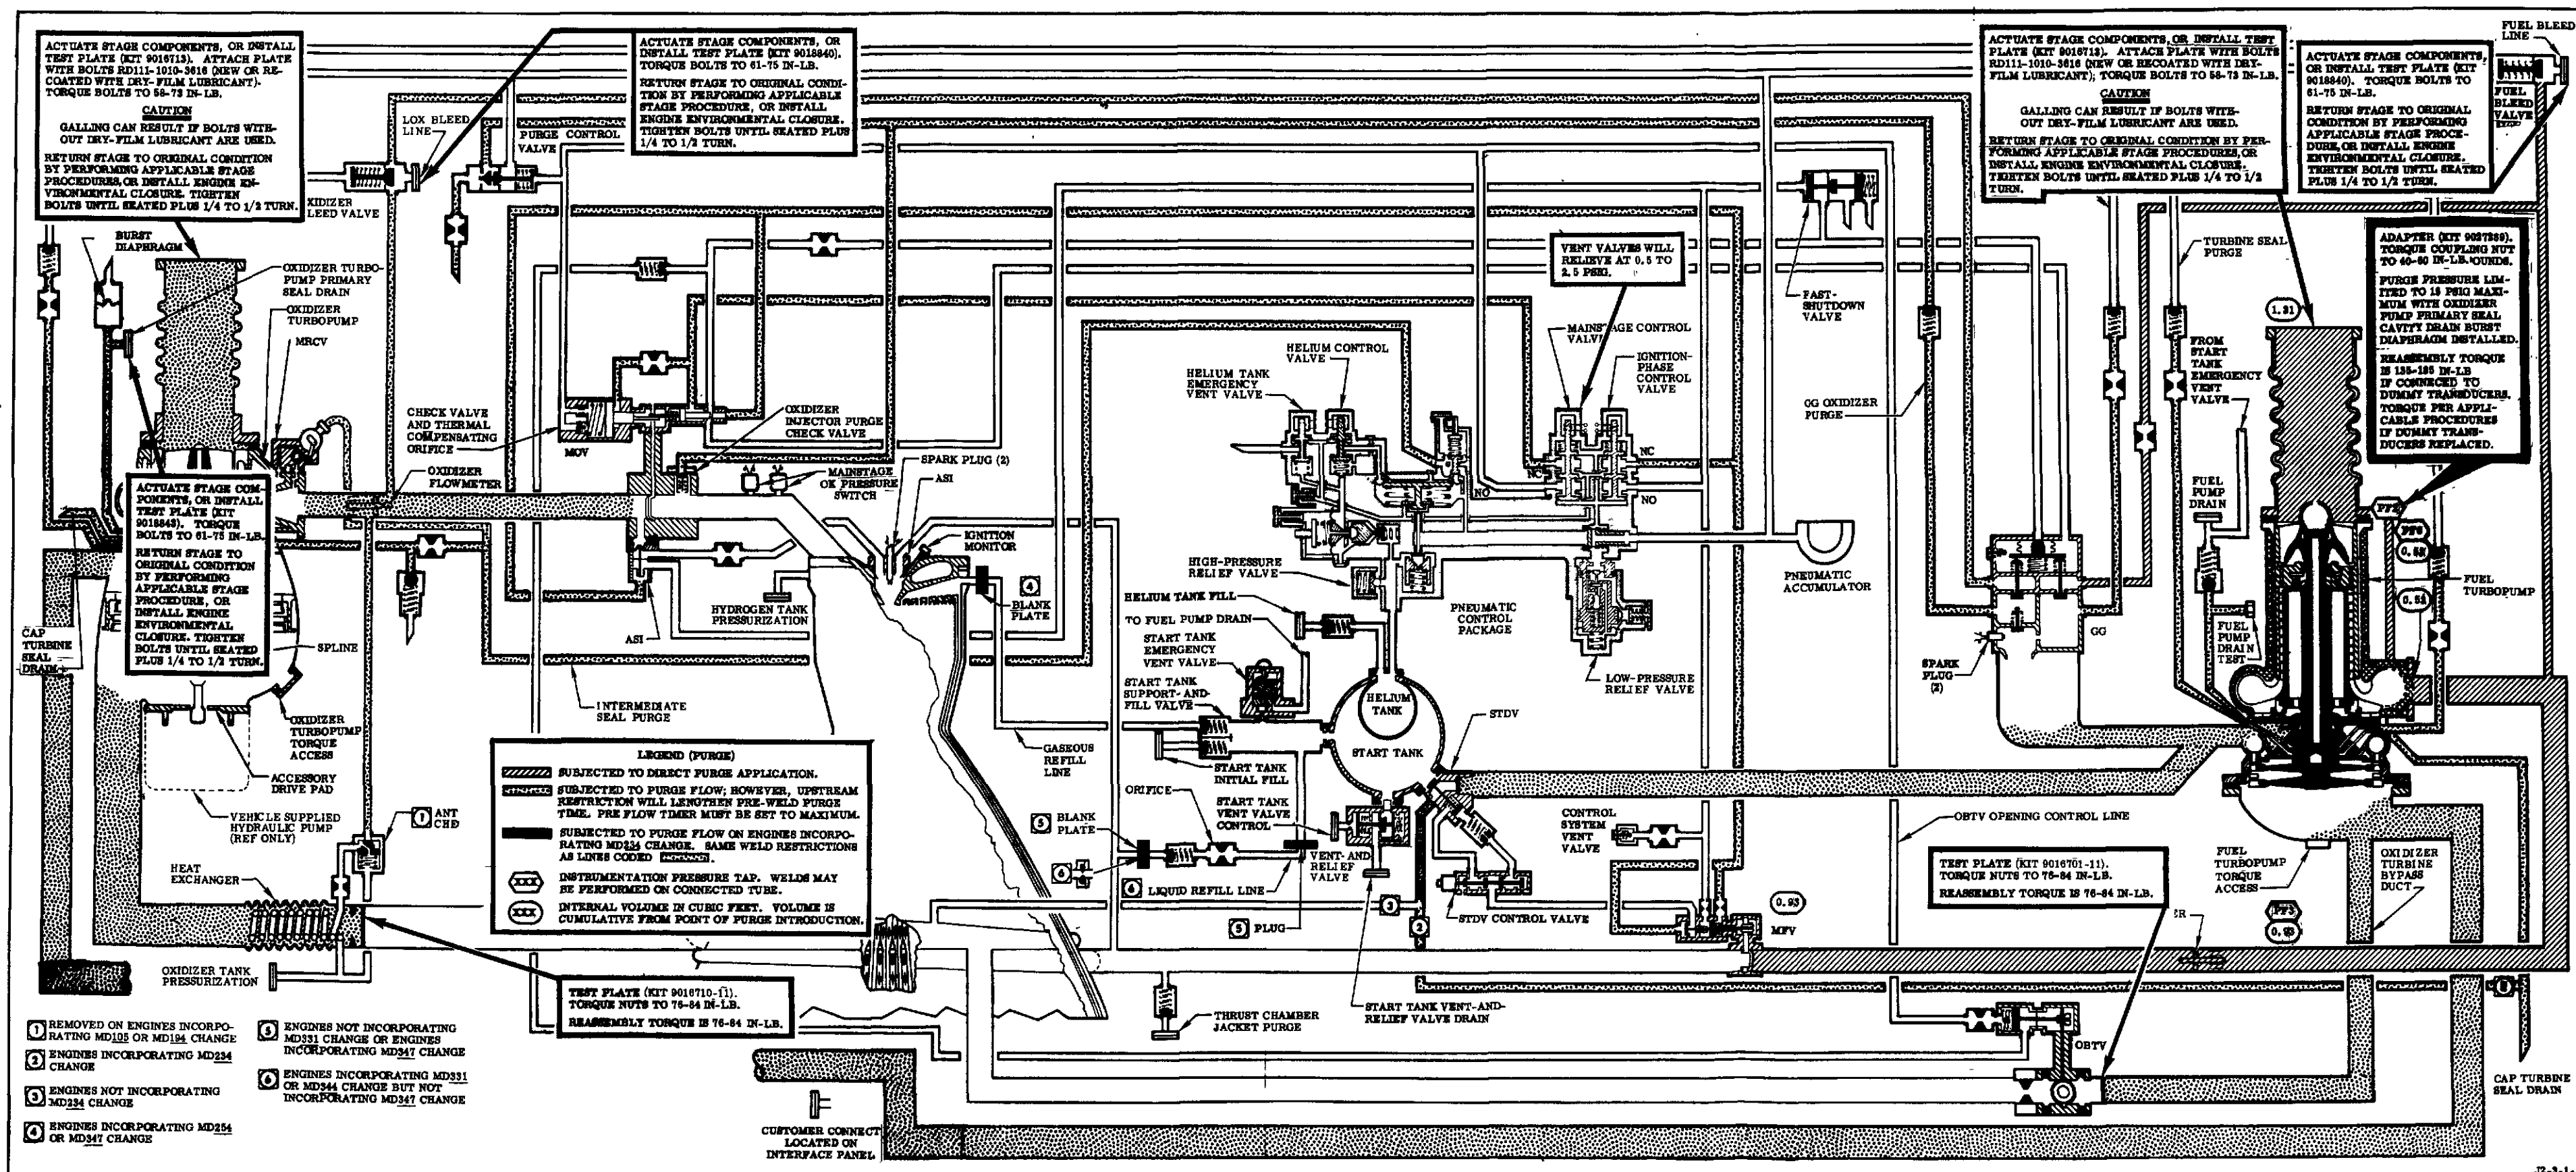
Engine Purge Schematics for In-Place Tube Welding (Sheet 11 of 13)
